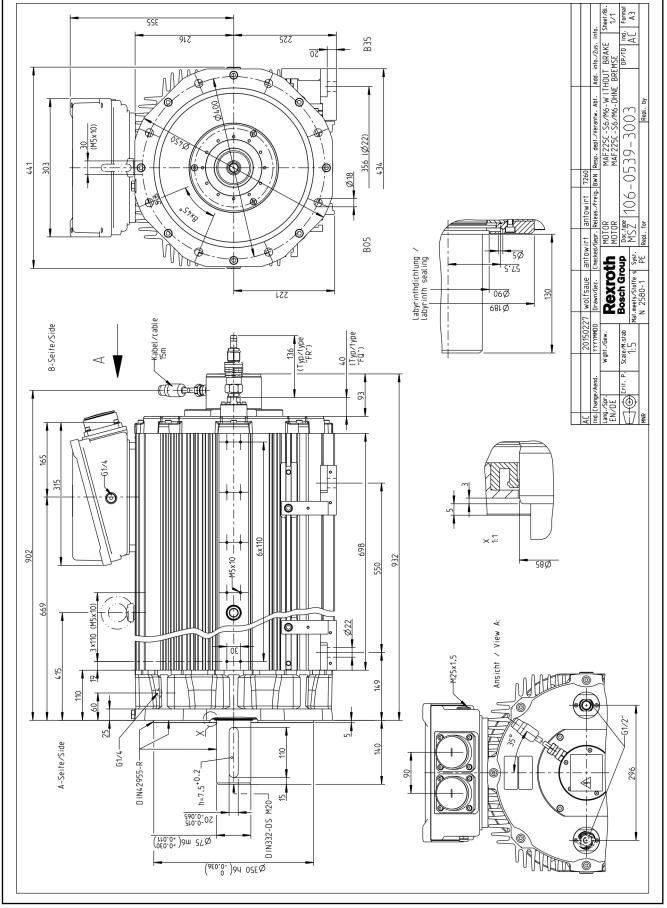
MAF225 with encoder M6/S6, without brake
